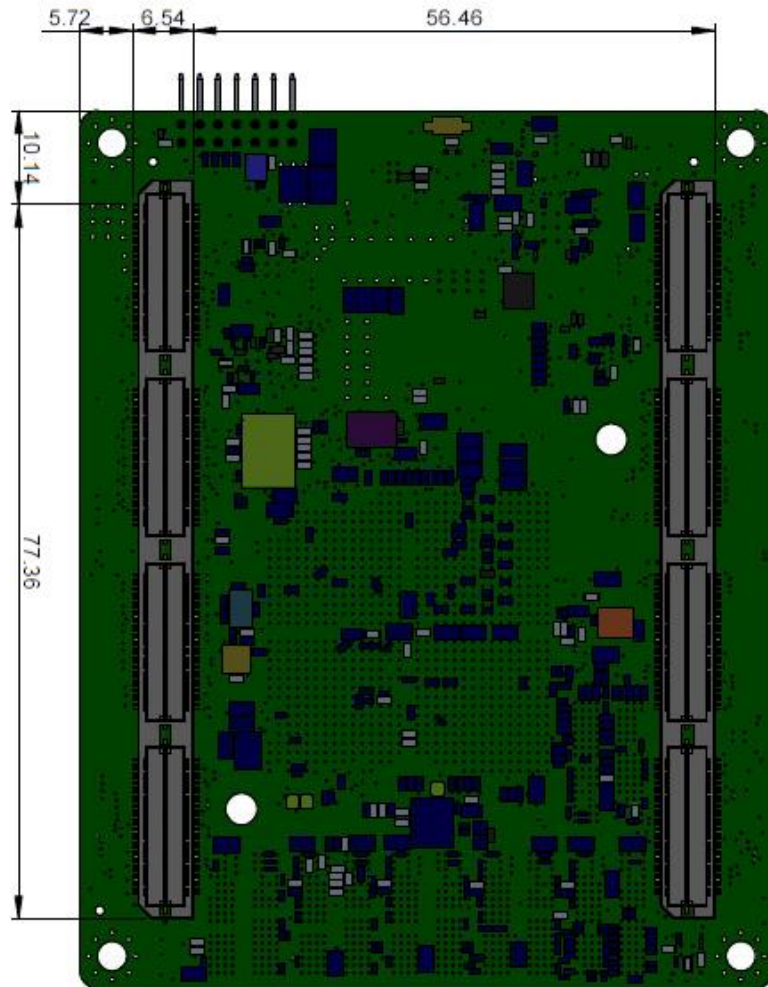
Mechanical dimension of Zynq Ultrascale+ MPSoC SOM - Bottom View
